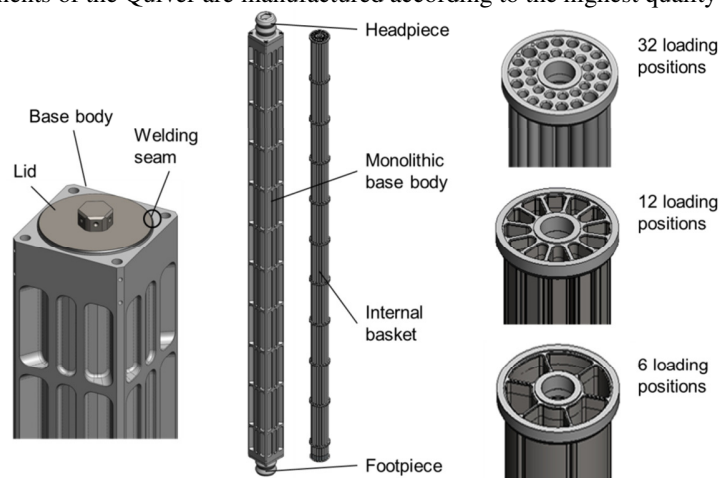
PWR-Quiver for damaged fuel rods: Sealing system (left), Head- and Foot piece mounted to the Base body and internal basket (middle) and exemplary configurations of internal baskets (right).
